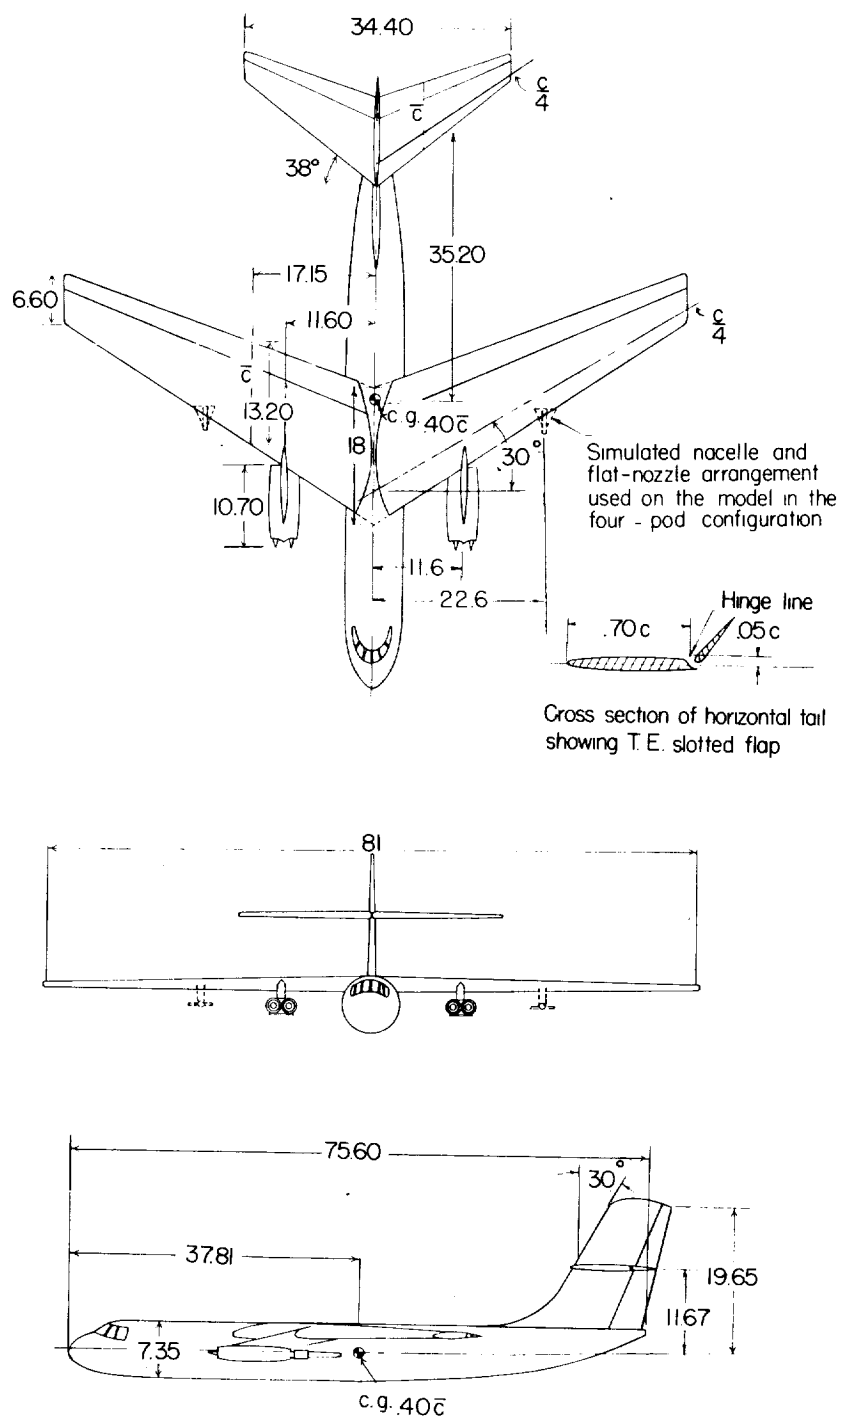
Three-view drawing of sweptback-wing jet-transport model used in the investigation. All dimensions are in inches.
